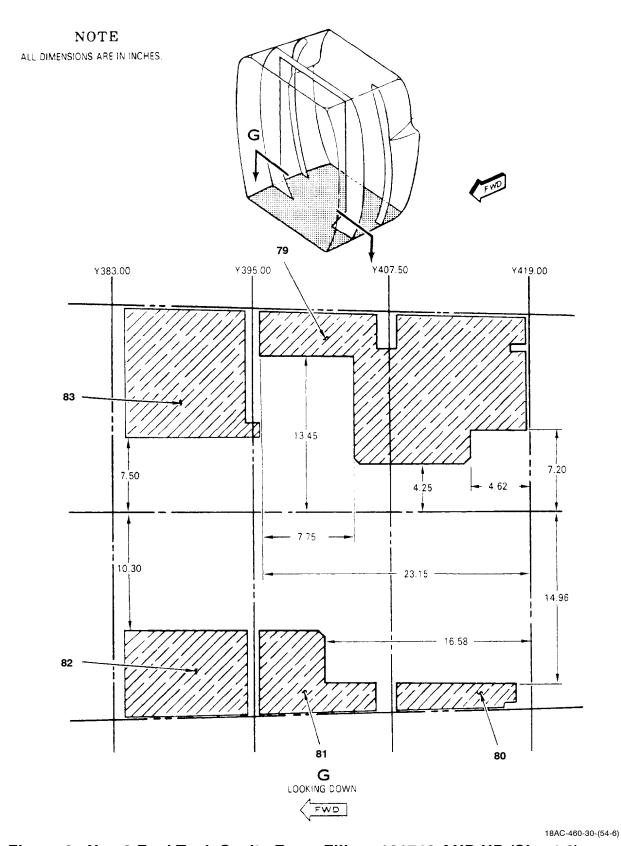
No. 2 Fuel Tank Cavity Foam Filler - 161742 AND UP (Sheet 6)
